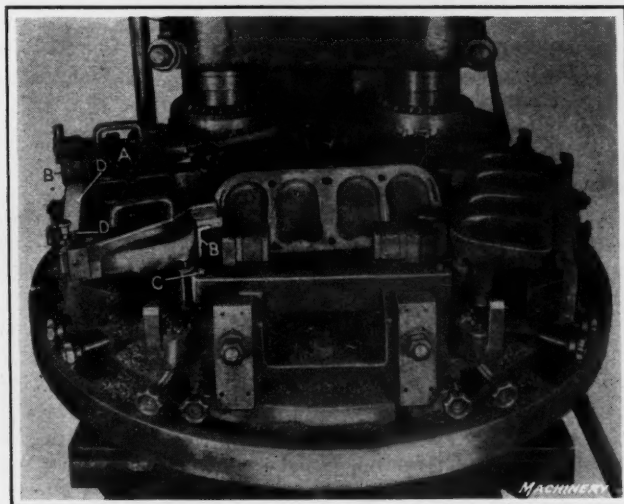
Newton Continuous Rotary Miller machining Automobile Engine Cylinder Heads
